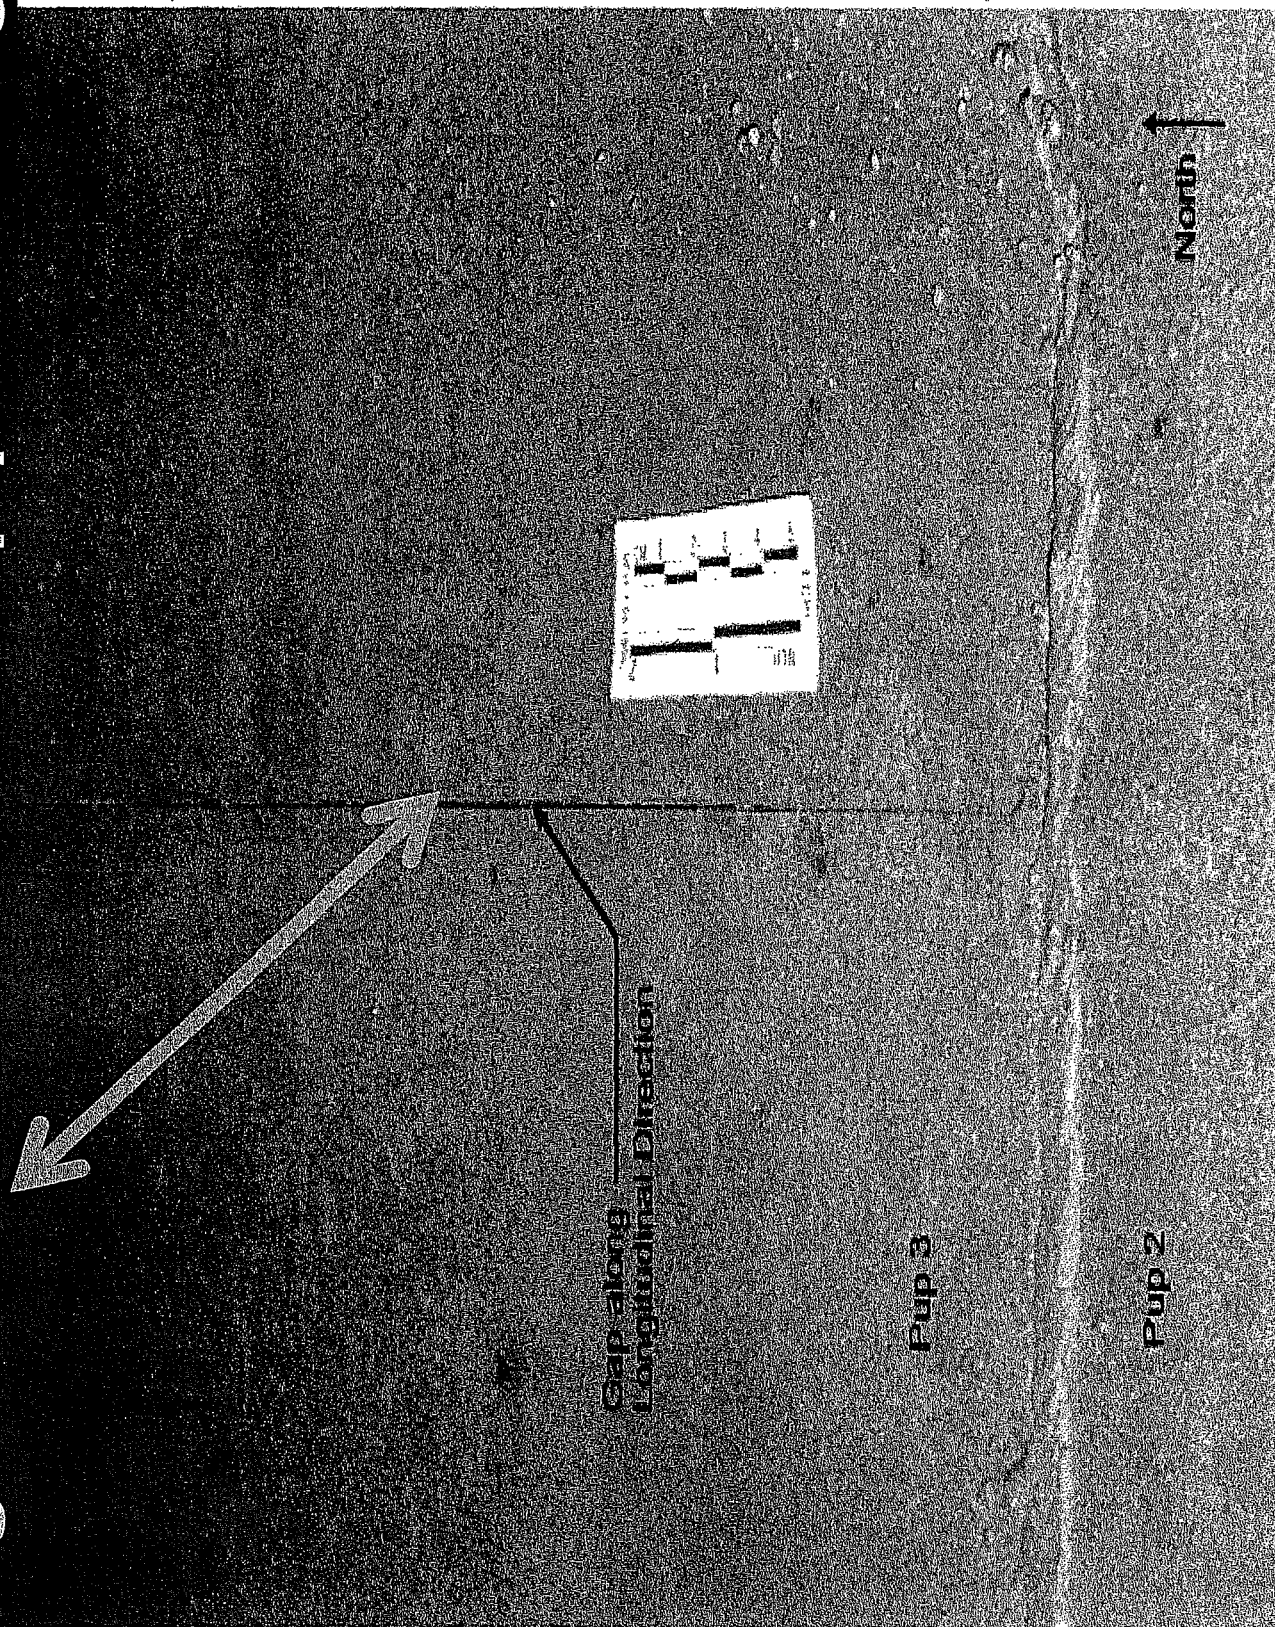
Inside wall of pup 3 showing a longitudinal gap that extended the length of the pup.
